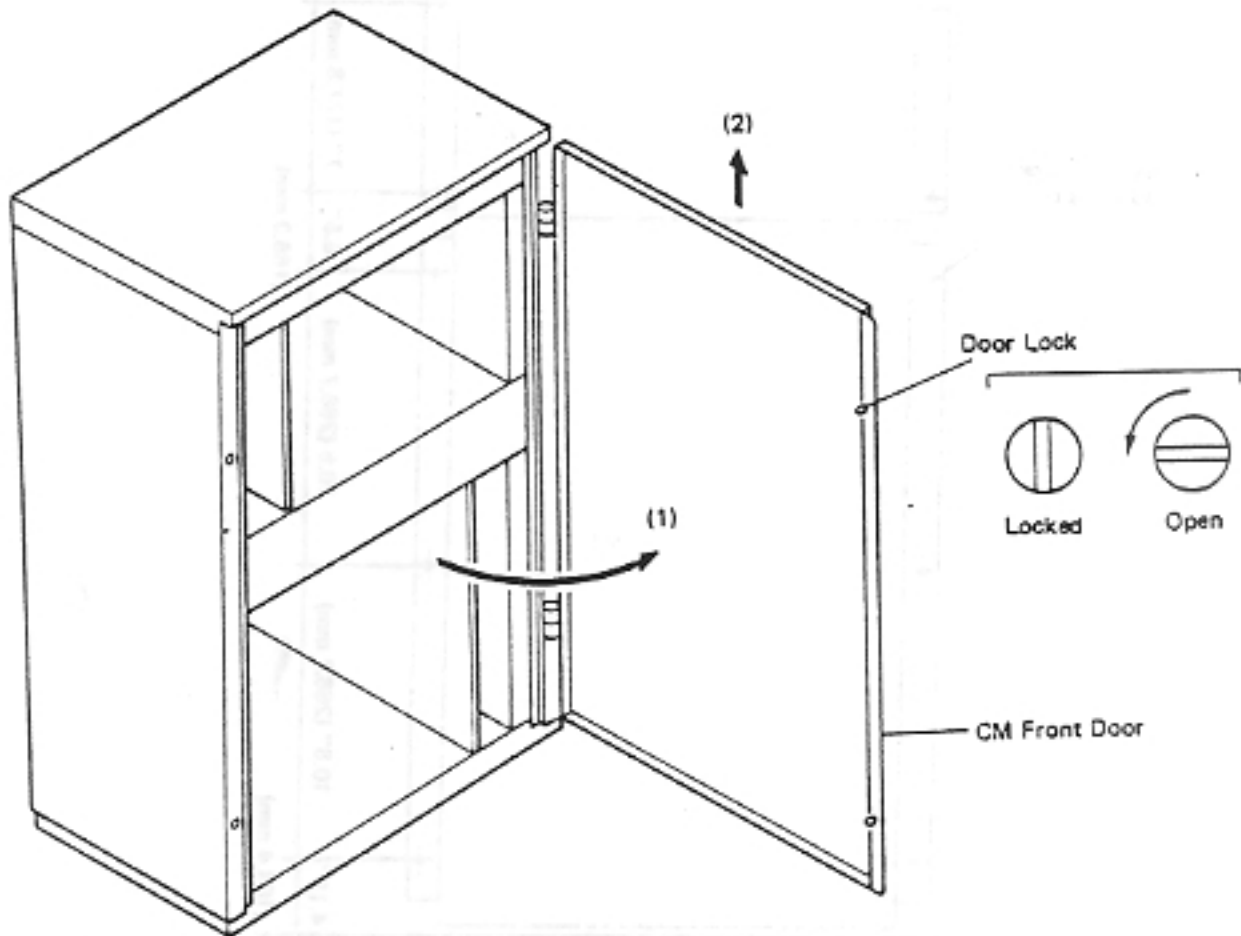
EX-824/1648CM Front Door Removal
